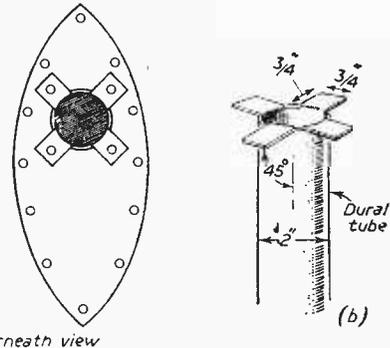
Details of the mounting required for the scheme shown in Fig. 5.
